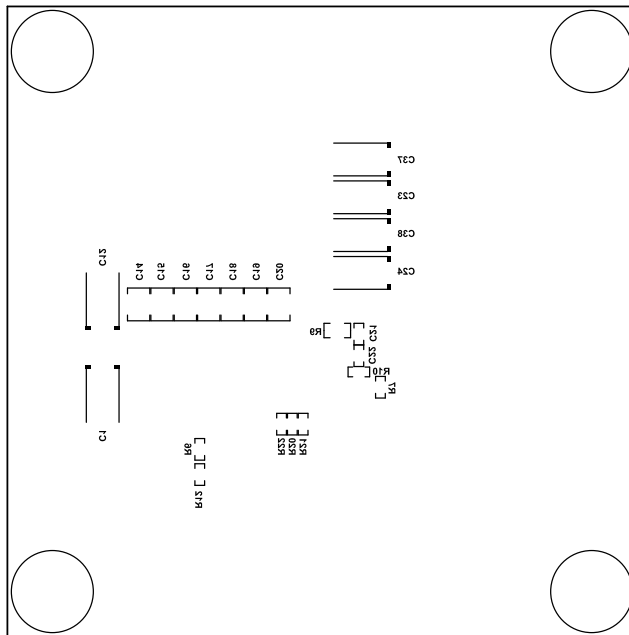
PWR-784EVM Bottom Overlay Layer (top view)
